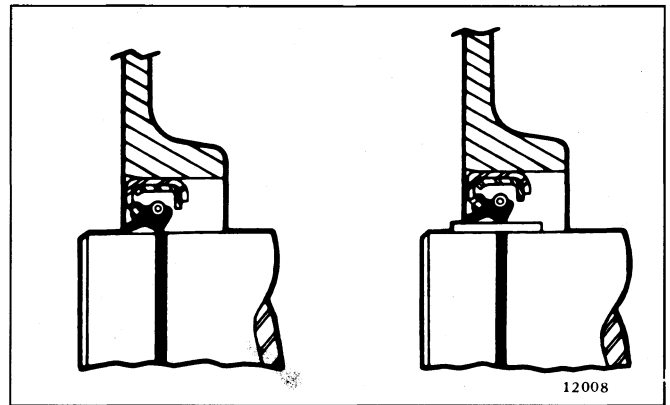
Crankshaft Oil Seal Sleeve - Former
